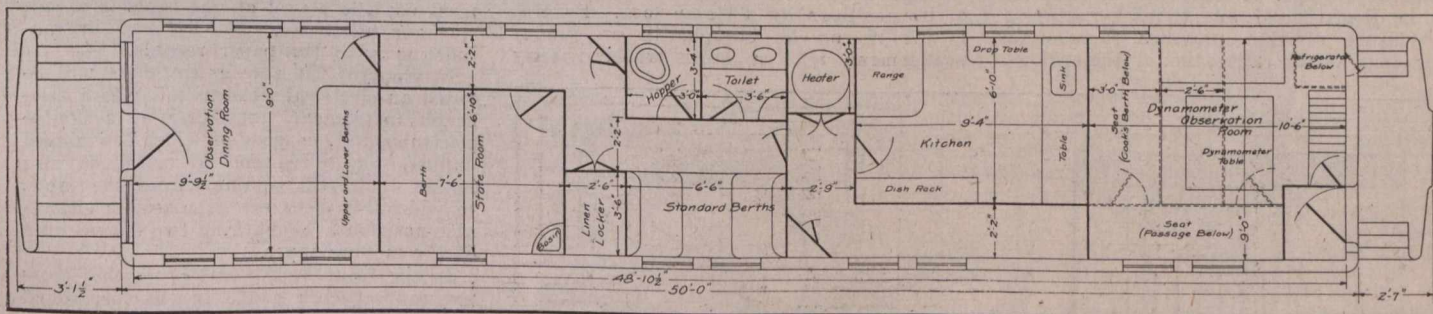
Floor Plan and Interior Arrangement of Dynamometer Car.
